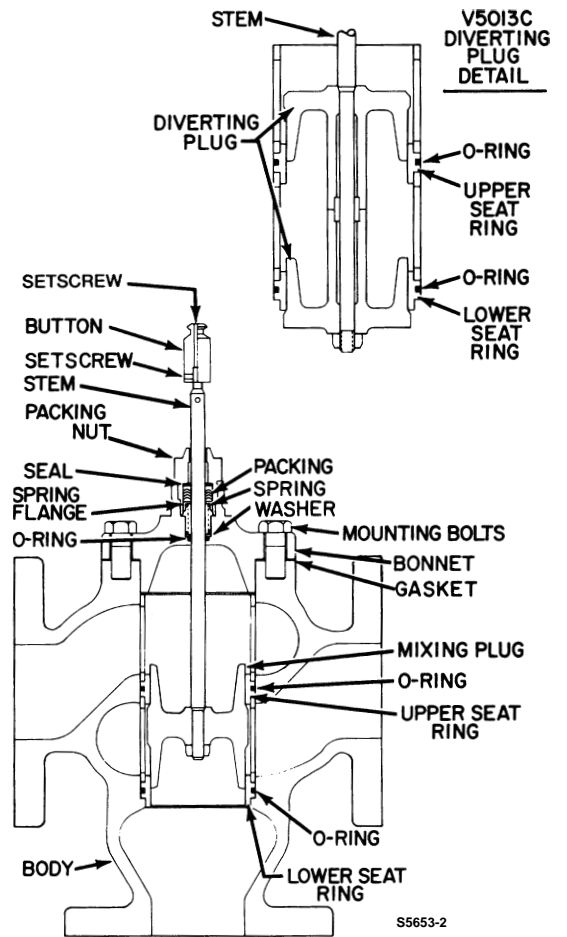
Three-Way V5013B-E Flanged Body Valve—Cutaway.
